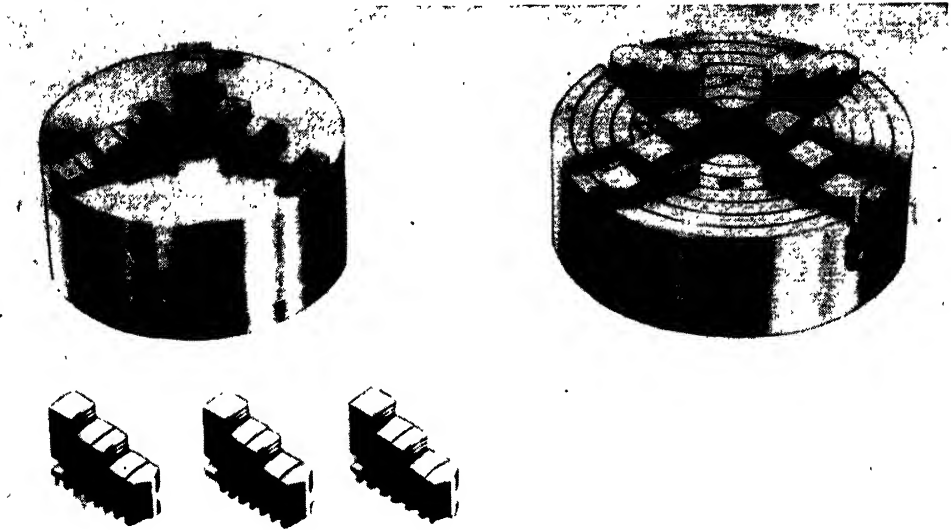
Two types of lathe chucks, a universal 3-jaw chuck and an independent-jaw (4-jaw) chuck. (South Bend Lathe Works)
